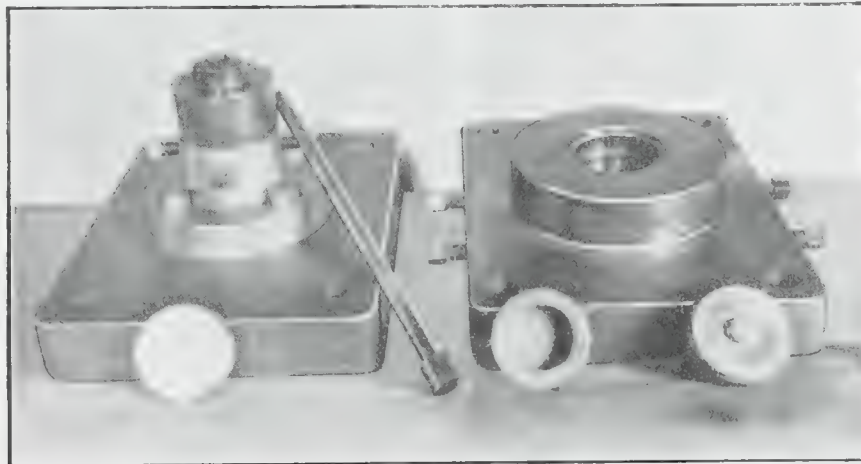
A. DIE FOR FORGING BRASS SOCKETS.
